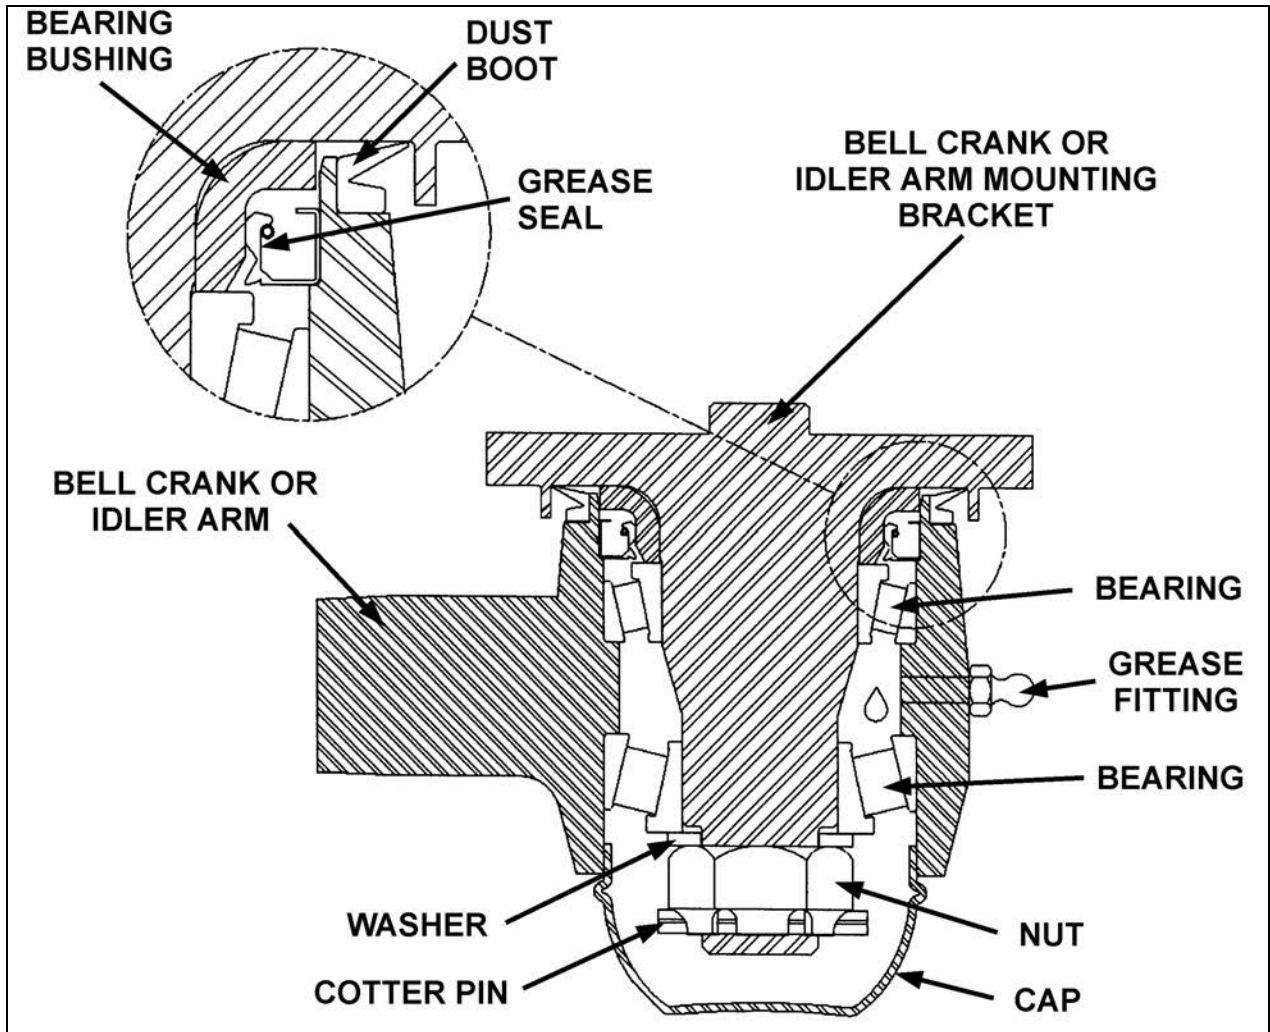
BELL CRANK AND IDLER ARM 16109
